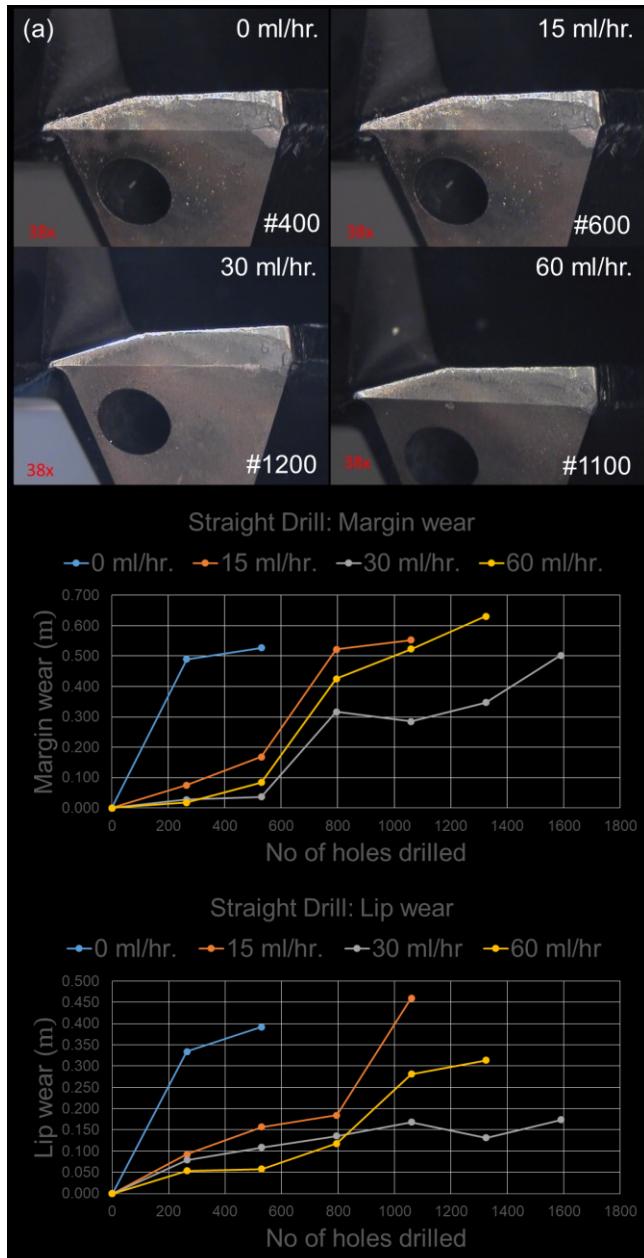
TOOL WEAR IN STRAIGHT DRILLS (a) TOOL WEAR OF CUTTING EDGE AT THE END OF TOOL LIFE (b) MARGIN WEAR AT DIFFERENT NO OF HOLES DRILLED (c) LIP WEAR AT DIFFERENT NOF OF HOLES DRILLED
